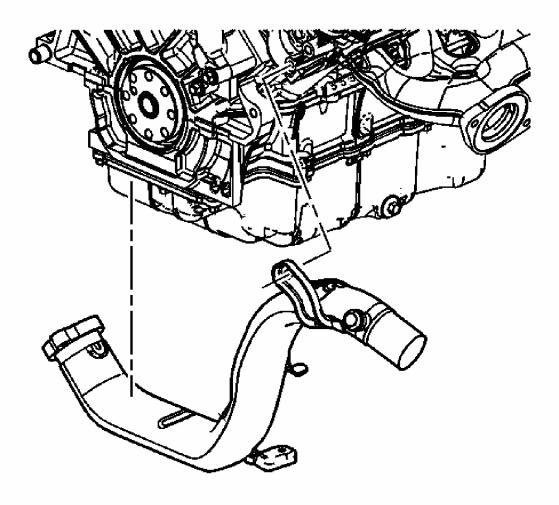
Identifying Exhaust Intermediate Pipe Courtesy of GENERAL MOTORS CORP.
